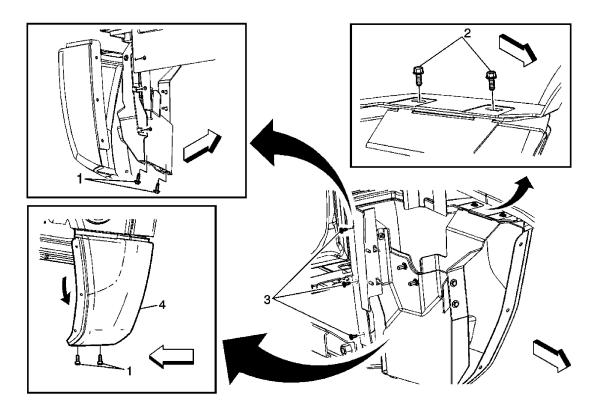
Replacing Rear Bumper Extension Courtesy of GENERAL MOTORS CORP.
